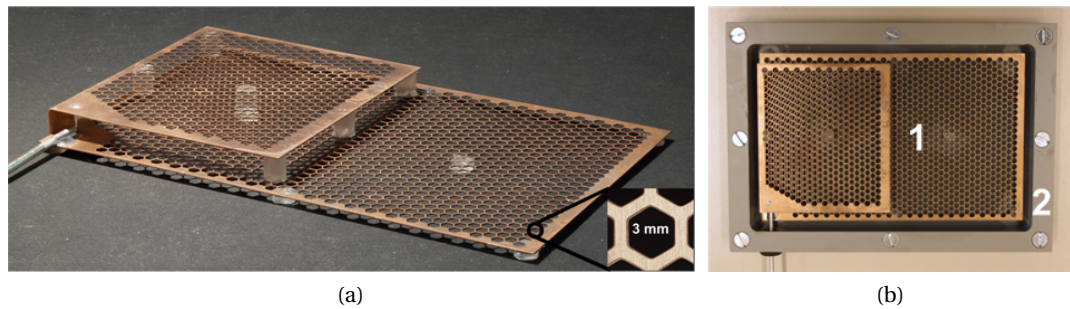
Conductive parts of the hexagon PIFA prototype: (a) Conductive parts bended, coaxial feeding soldered and spacers introduced and (b) Placed inside the mold.
